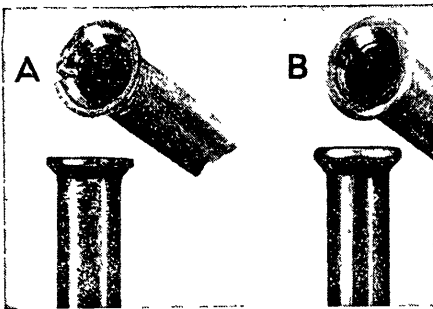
Showing advantage of double lap flar (B) over single lap flare (A) on hydraulic brake tubing
